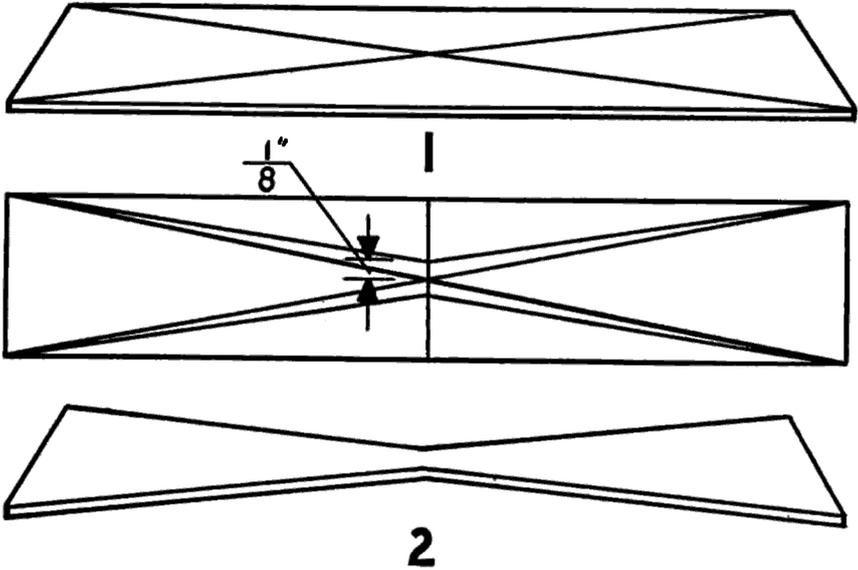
CUTTING BENT WOOD PROPELLER BLANK
